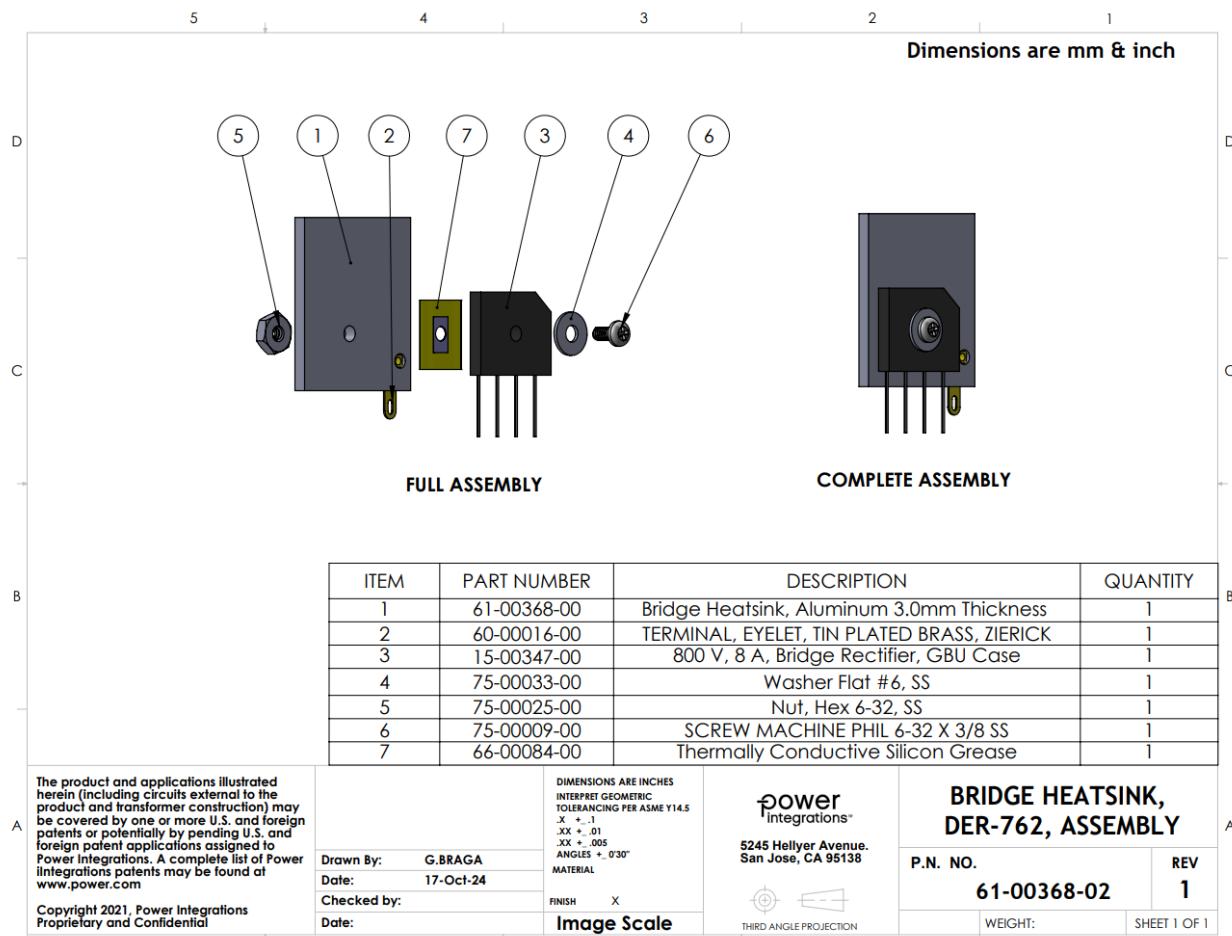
DER-762 Bridge Rectifier Heat Sink Assembly.
